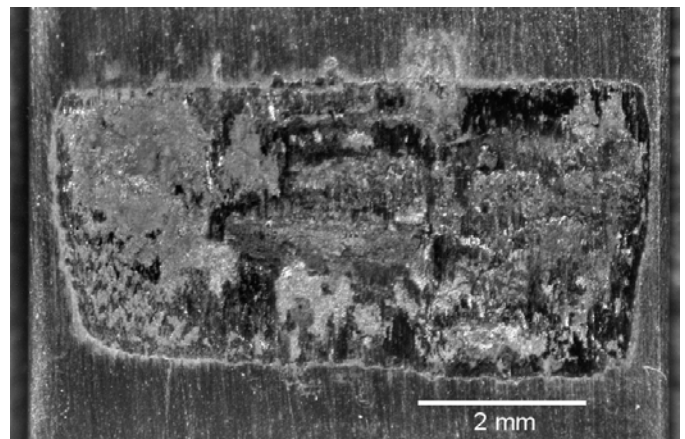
Fretting scar from specimen 05-953 showing wear damage due to gross slip after 2 million cycles
